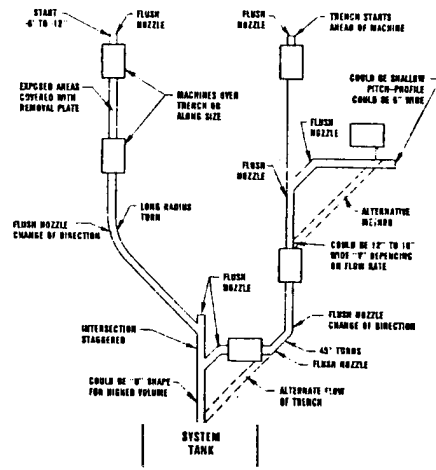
PLAN VIEW OF A TRENCH LAYOUT
